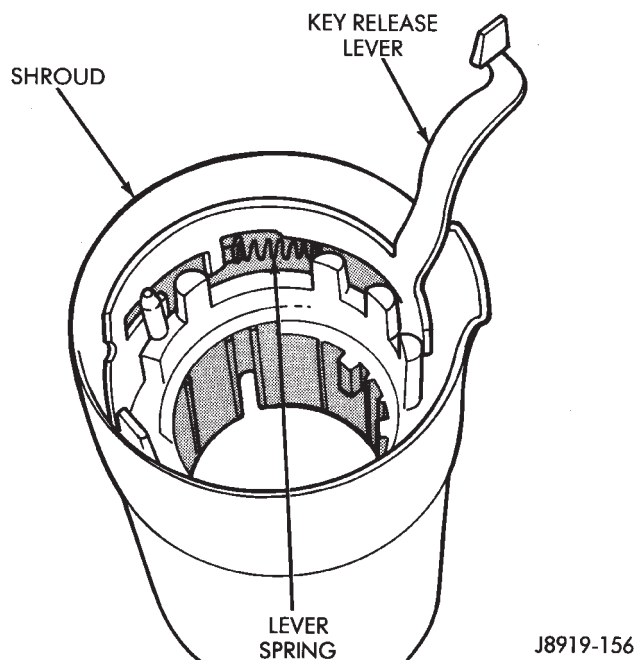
Key-Release Lever & Spring Removal ASSEMBLY
